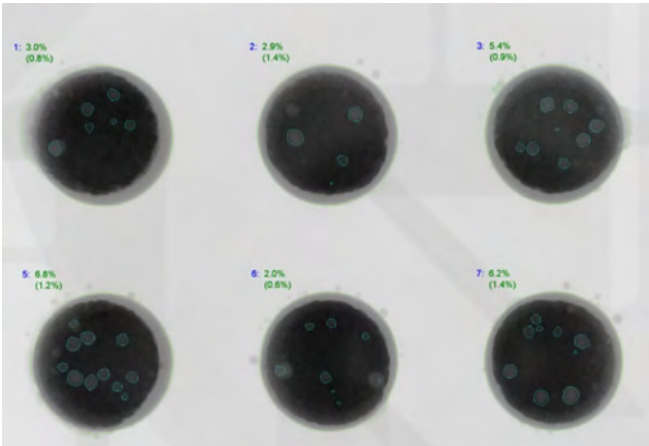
A typical X-ray inspection result of the 35x35 BGA with SAC305 balls.
